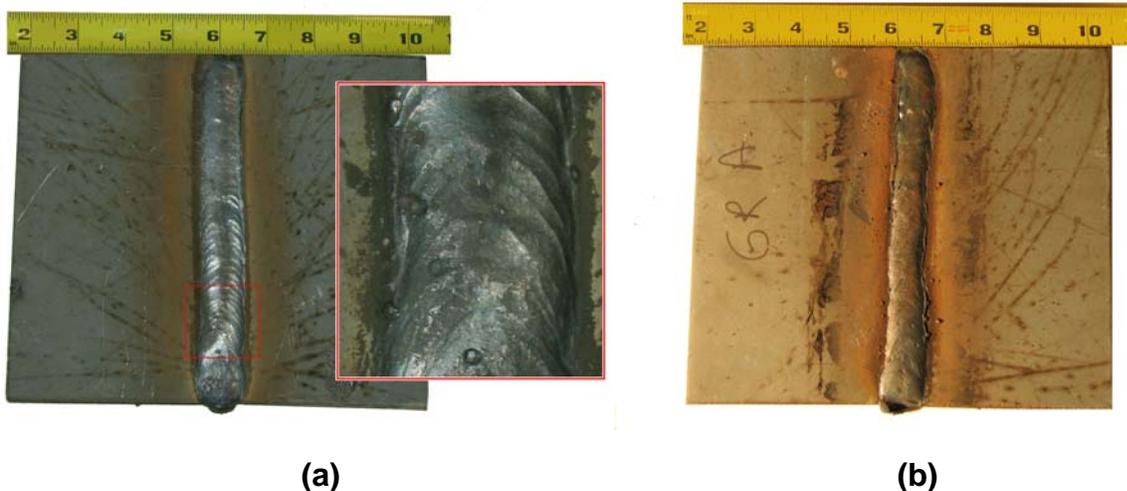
(a) Front weld bead and weld pool segment (inset), and (b) rear weld bead of ABS-A welded specimens.
